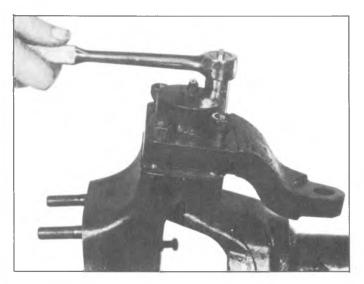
C-29K--Installing Bearing Cap/Steering Arm
